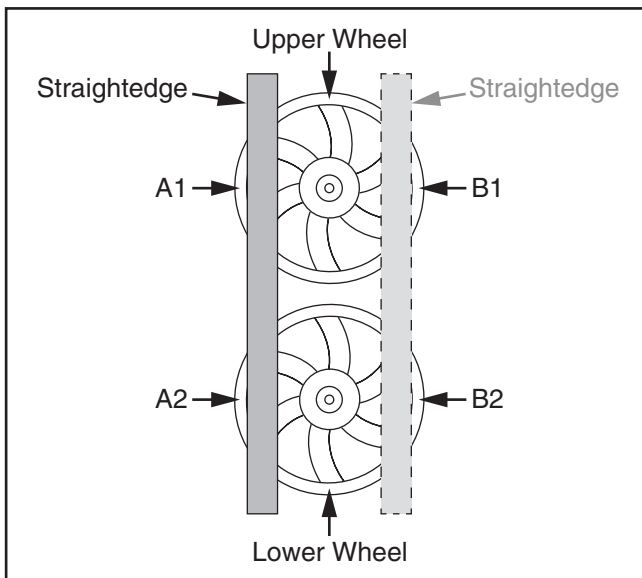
Example of using a straightedge to check lateral wheel alignment.
